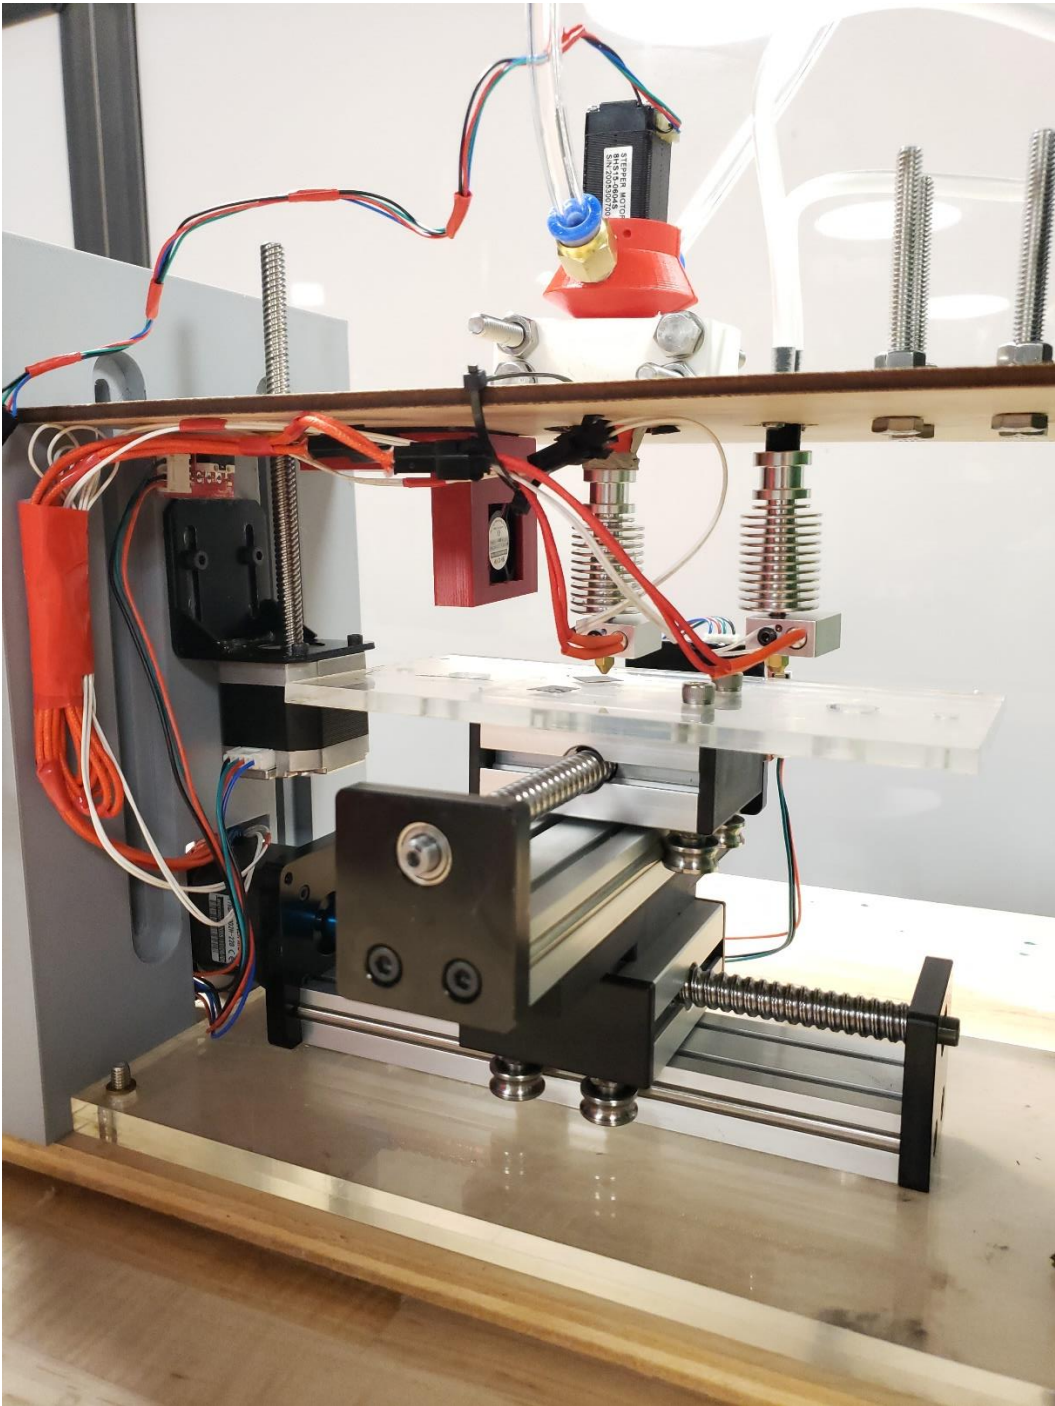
Mixing Chamber with Sealing Channel and Longer Mounting Panels
